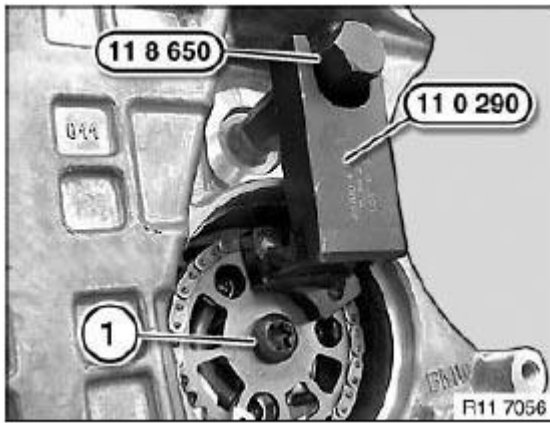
Positioning Special Tool 11 0 290 On Sprocket Wheel And On Special Tool 11 8 650
